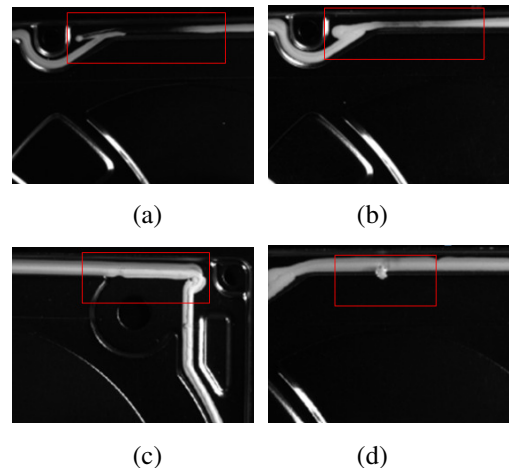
Glue route defects (a) incomplete (b) too thin (c) offset and too thick (d) protruding
